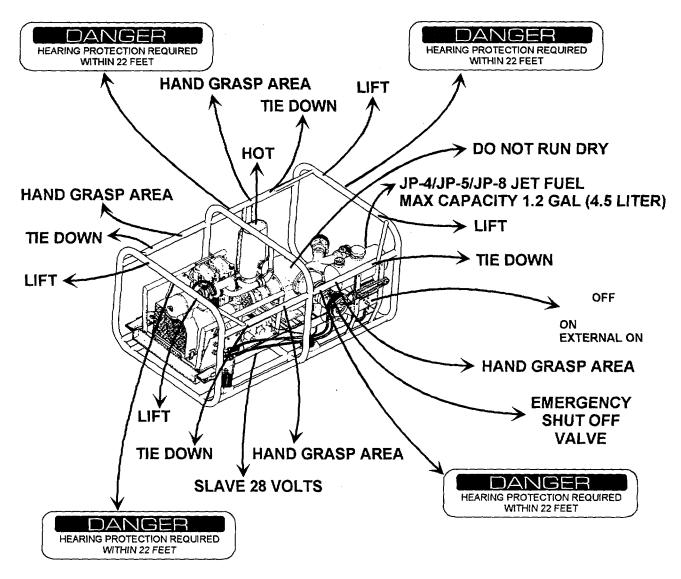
Decals and Instruction Plates, Pump-Engine Module (Sheet 2 of 2)
